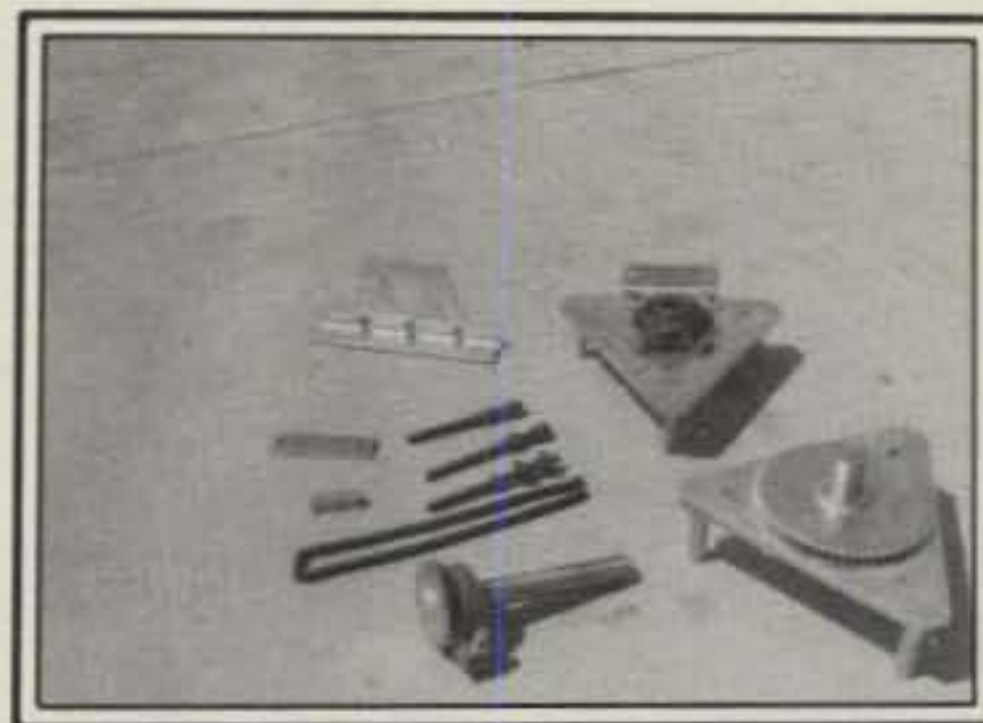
The mechanical components that make up the antenna rotating system prior to assembly.
